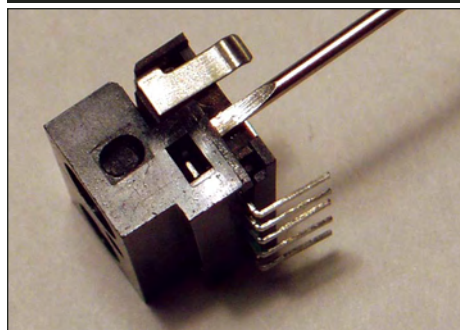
Optical sensor module removed from the forward lens housing and rear plastic housing mounts.
